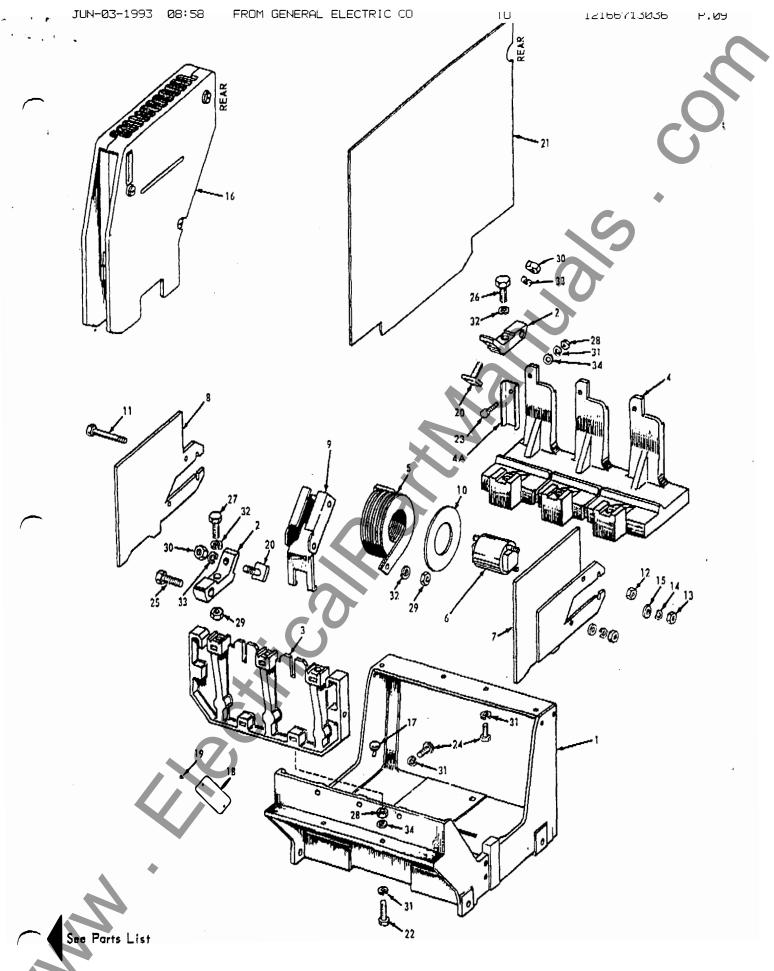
Frame Assembly, Stationary Contact, Blow Out Pole and Cail Assembly.
